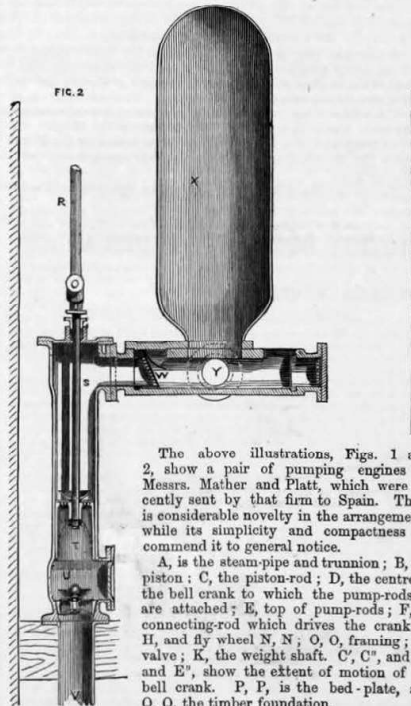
shows the details of the pumps; S, piston-rod; T, valves of piston; U, bottom valve; W, suction valve and pipe; X, air vessel; Y, delivery pipe; V, steel pipe.
